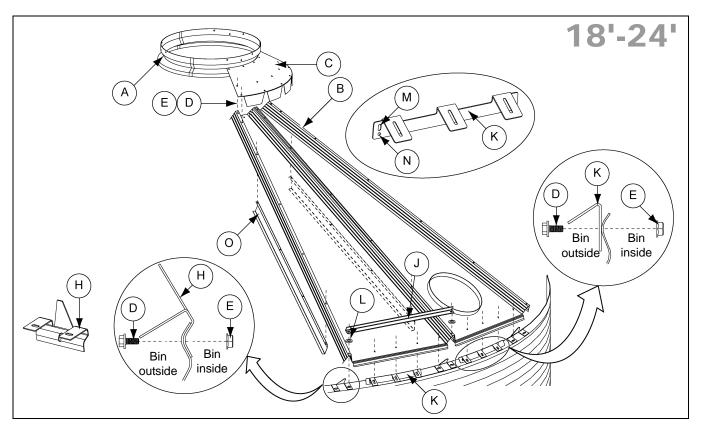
H Roof Panel Assembly (18'-24' Diameter Bins)
